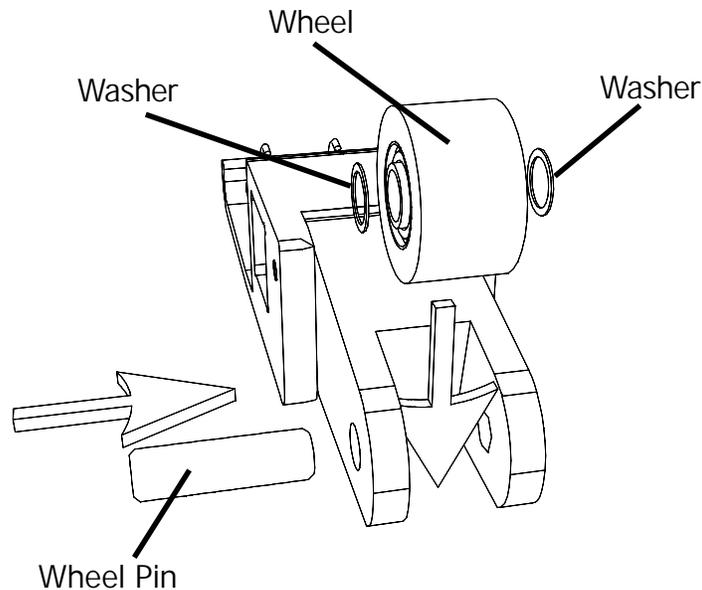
Place washers on either side of the wheel before inserting the pin
